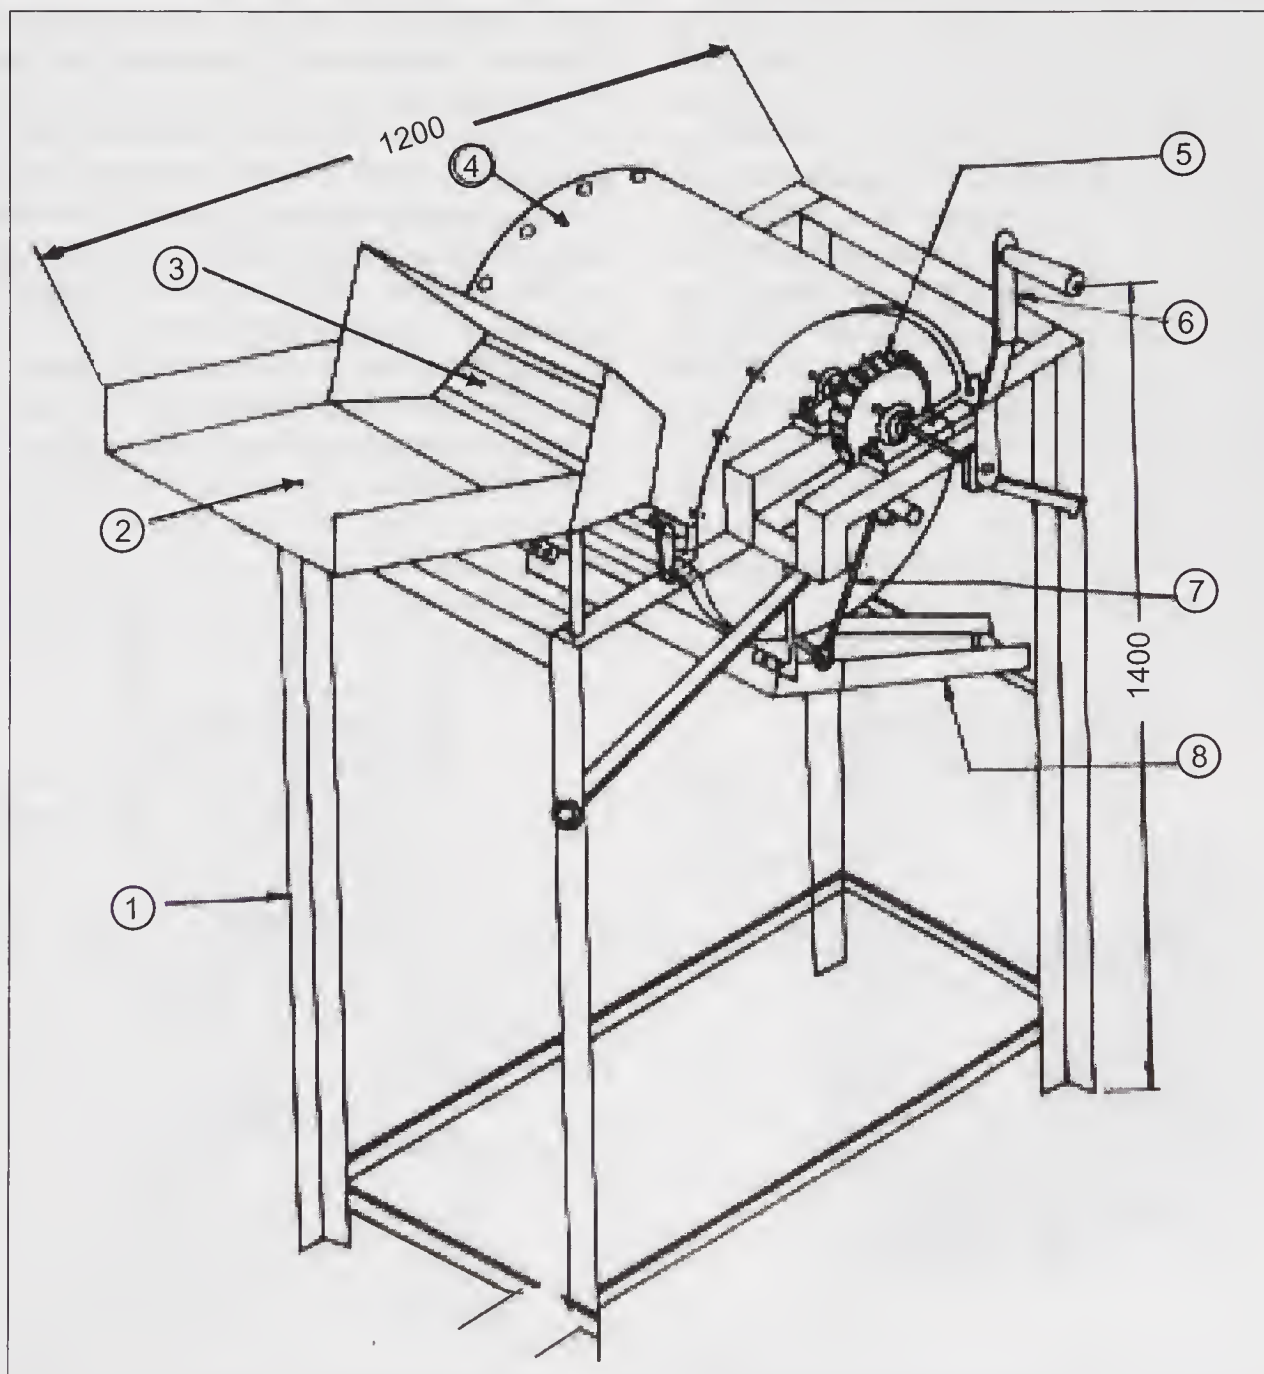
Castor pod sheller manual type. 1, Frame; 2, Hopper; 3, Shelling roller; 4, drum; 5, gears; 6, Handle; 7, Crank and 8, Castor outlet.
